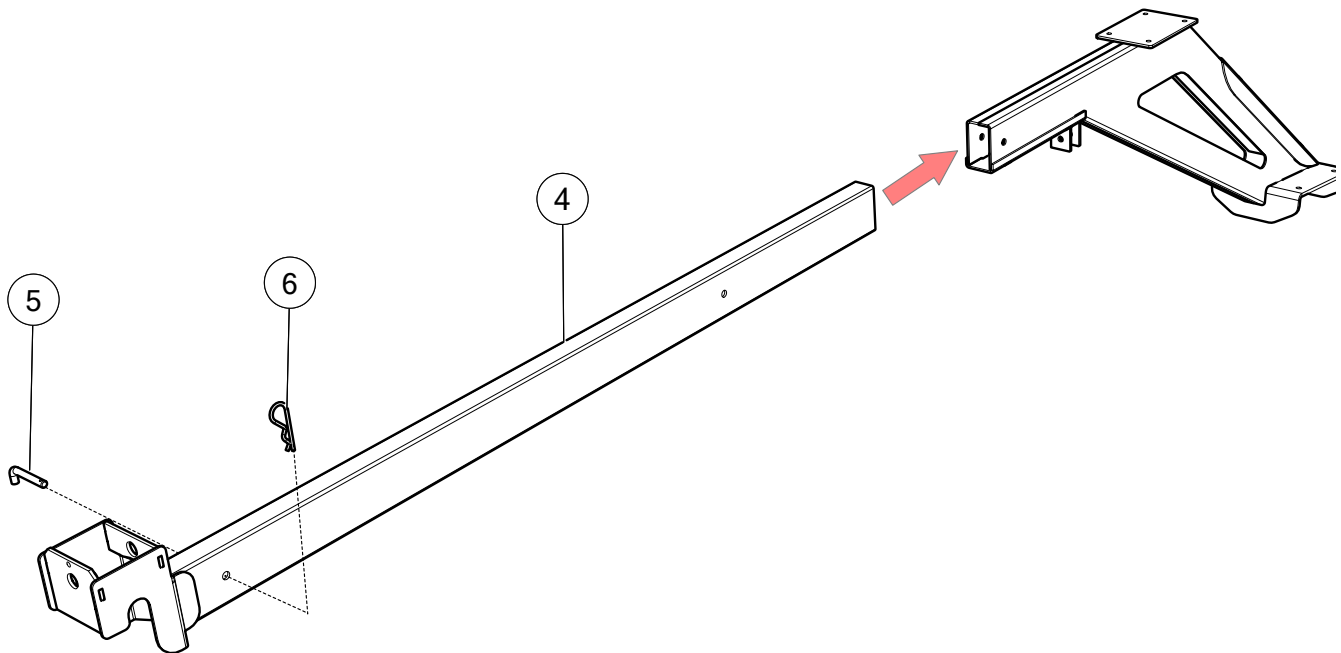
Attaching the Transport Arm Weldment
